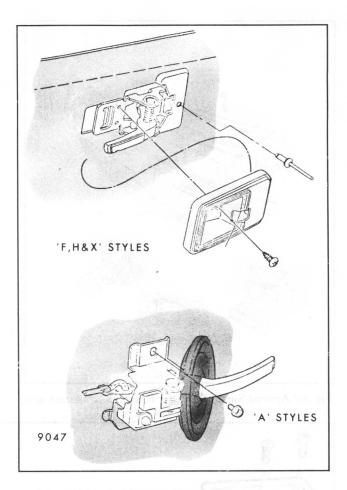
Typical Remote Control Handle Cover Plate Installations - "F, H and X" Styles
